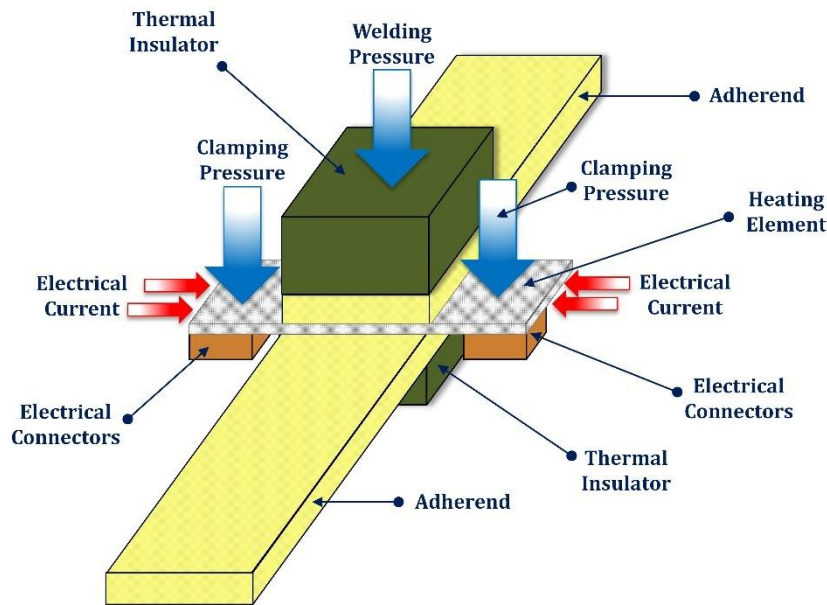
Resistance Welding Set-Up. The schematic is adapted from [35].
